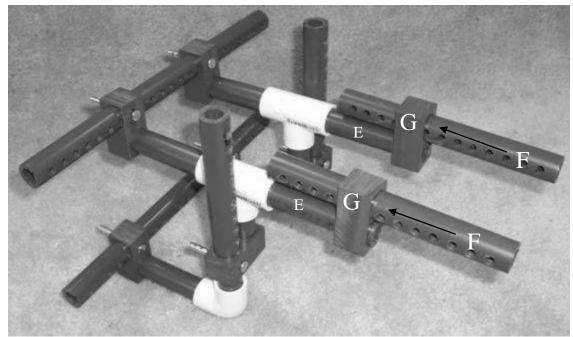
Assembly of the Small Wheelchair (Step 16).
